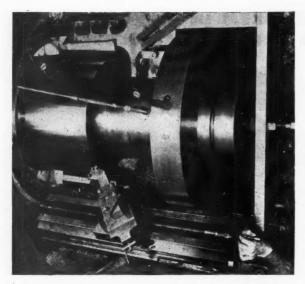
Close-up of buil gear journal in special jig, showing cutting tools, two-dial gages, lubricating line, and chip guards.
